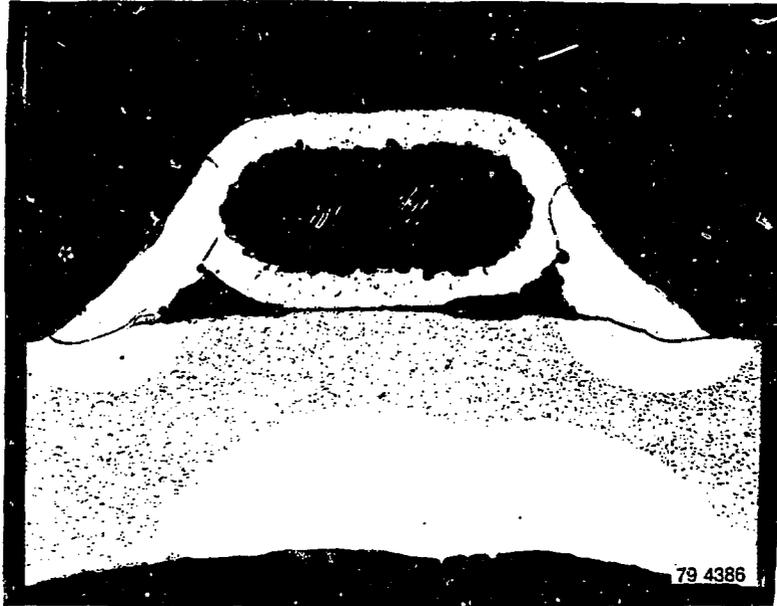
Cross section of surface thermocouple removed from junction; defective.
